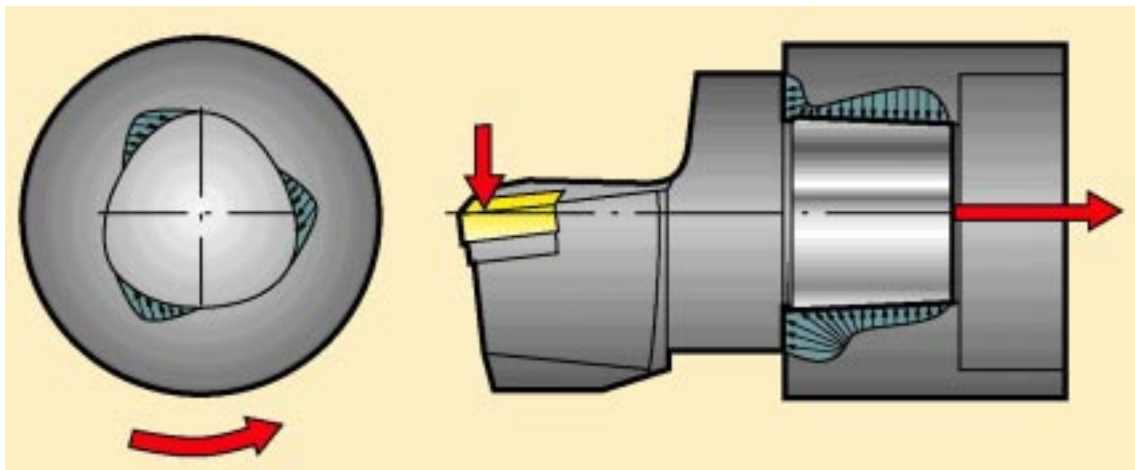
The clamping system used in the Seco Capto® Modular tooling used for turning tools (Courtesy Seco Tools, Sweden)
